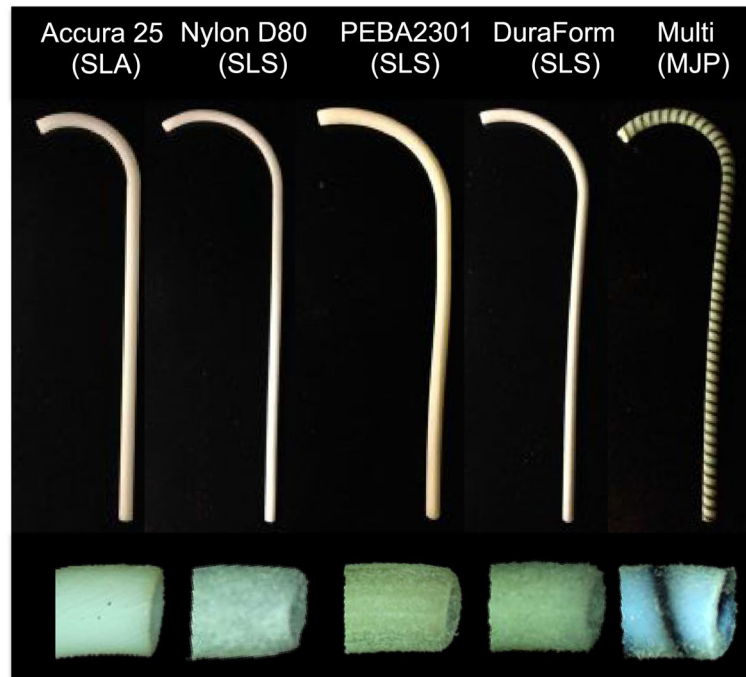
Examples of 3-D printed concentric tubes. The Accura 25 tube is printed with SLA. The Nylon D80, PEBA 2301, and DuraForm Flex parts are printed with SLS. The multimaterial part is printed with MJP.
